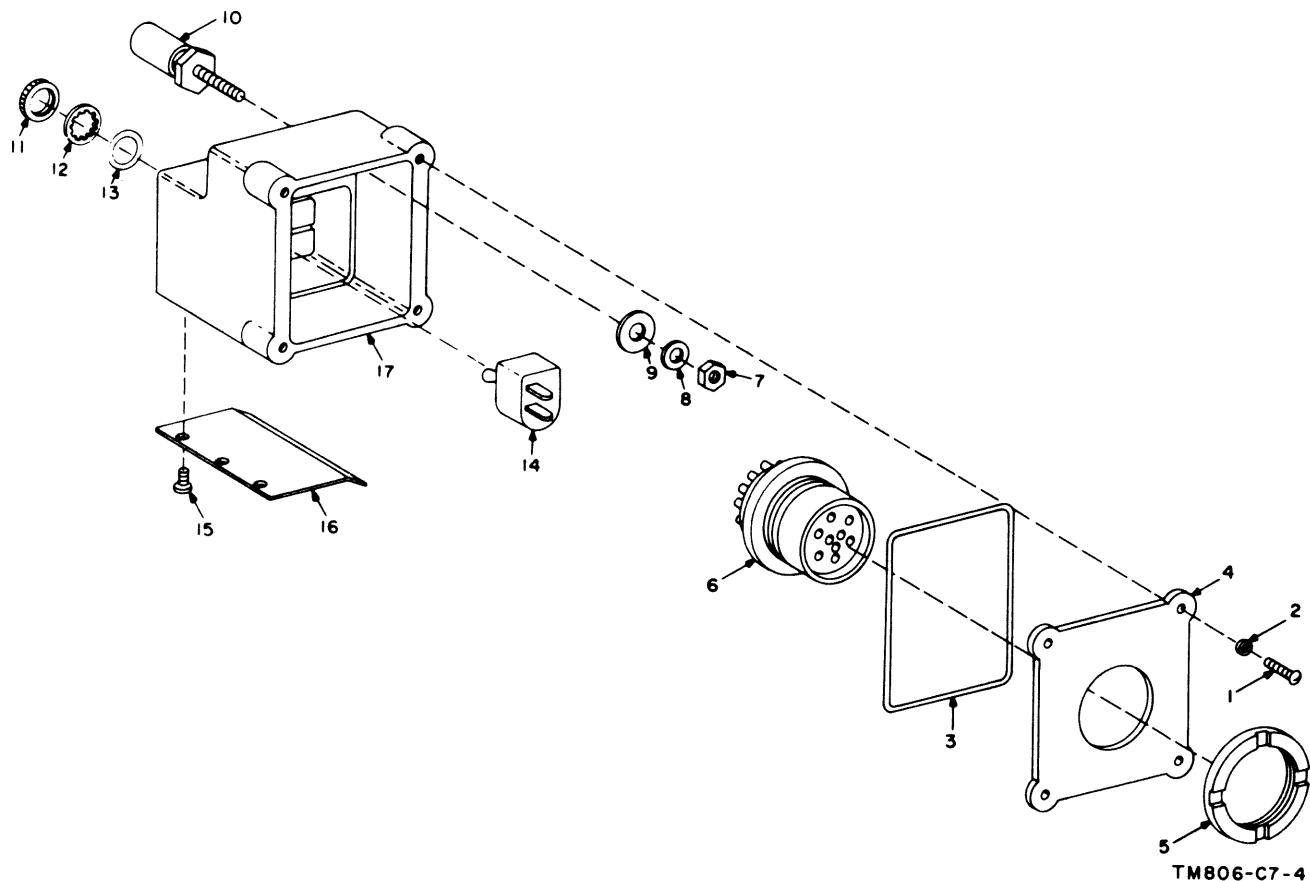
Switching Unit SA-708/GRC, exploded view.
